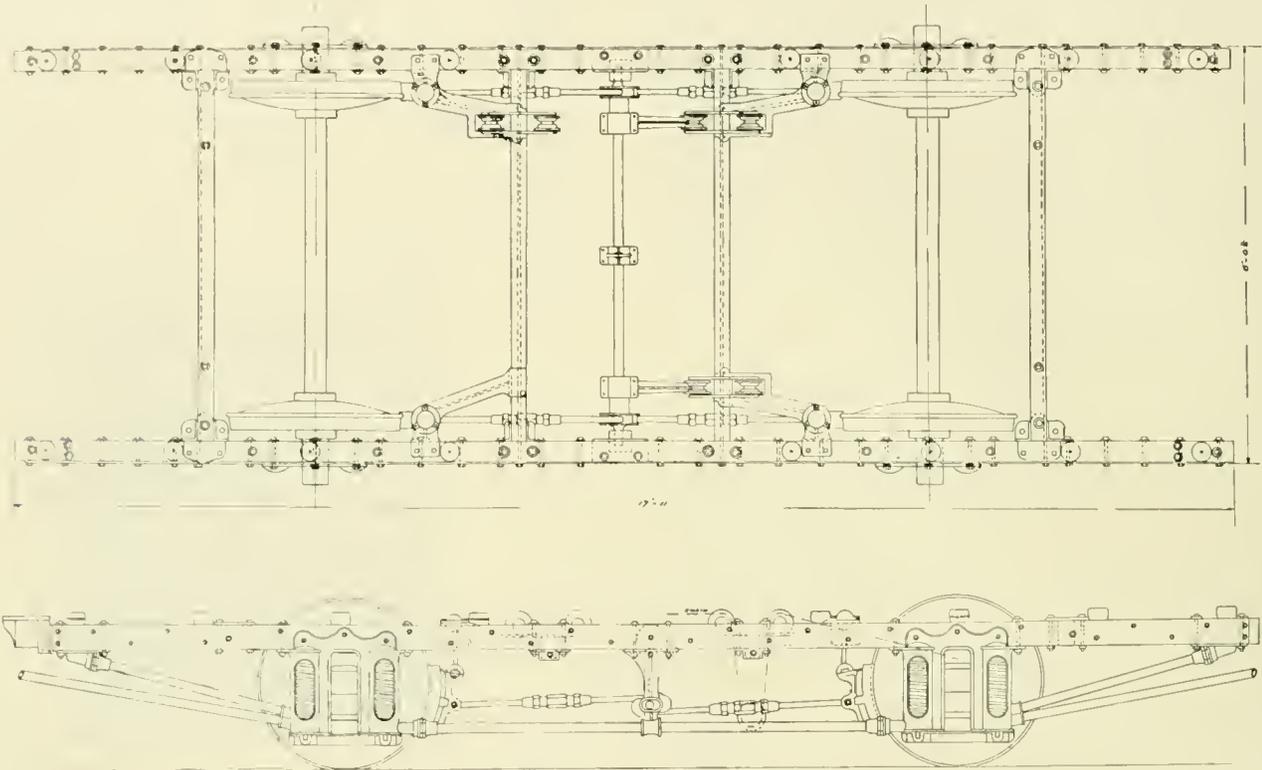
PLAN AND ELEVATION OF THE MOORE TRUCK.
